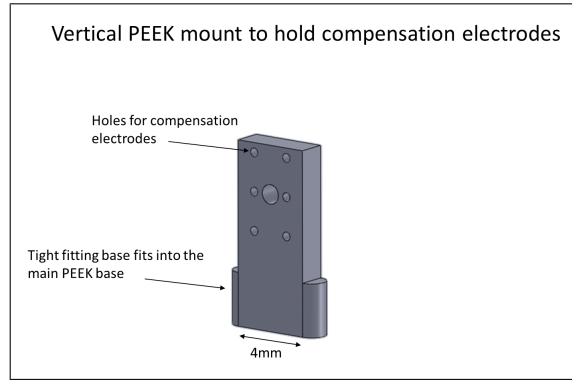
Solidworks drawing of the PEEK upright which holds the compensation electrodes.
